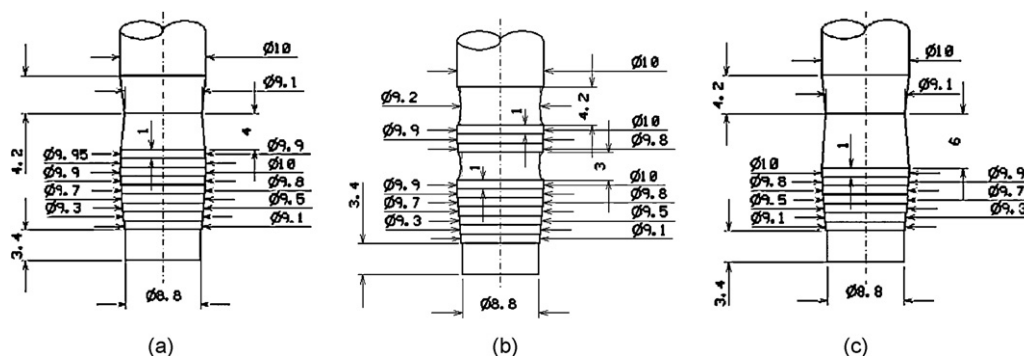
Punch tools geometries: (a) punch tool type I and (b) punch tool type II and punch tool type III.
